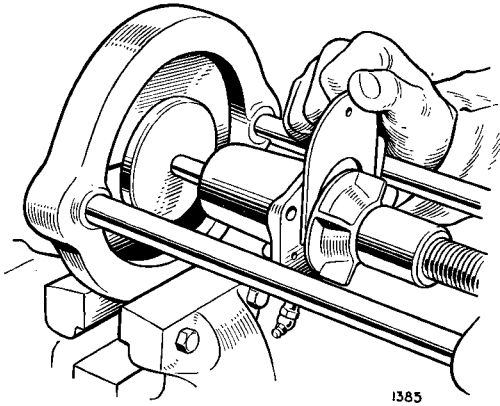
Using gauge to obtain 0.030 in. (0.762 mm.) clearance between impeller and housing face
